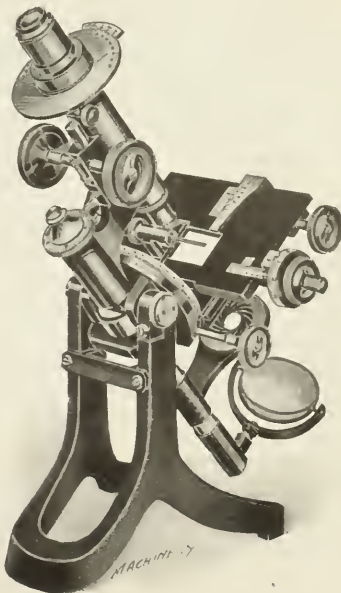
Schuchardt & Schutte Microscope for measuring Screw Threads
